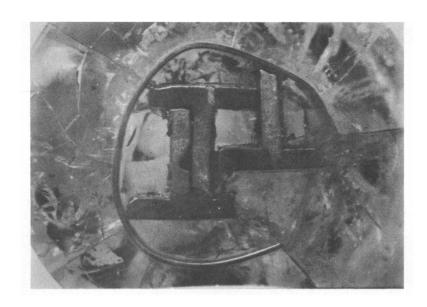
Puddle welded and machined specimen -4.5 X.
